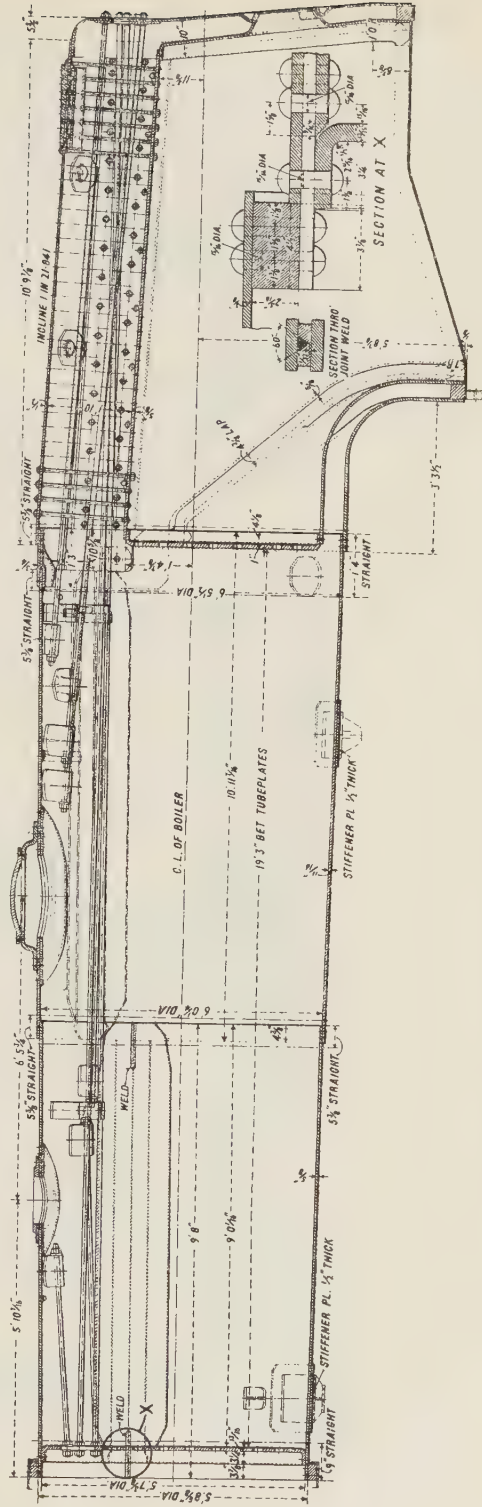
Sectional elevation of boiler, with details of welded and riveted joints.
